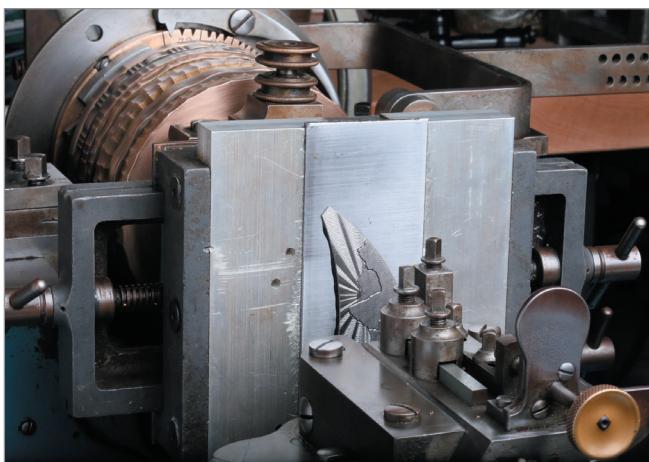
Titanium workpiece on a glue plate held and adjusted to center with the two-jaw eccentric chuck
